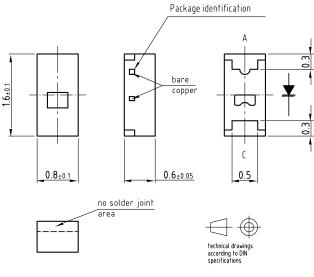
Issue: 3; 24.09.13
